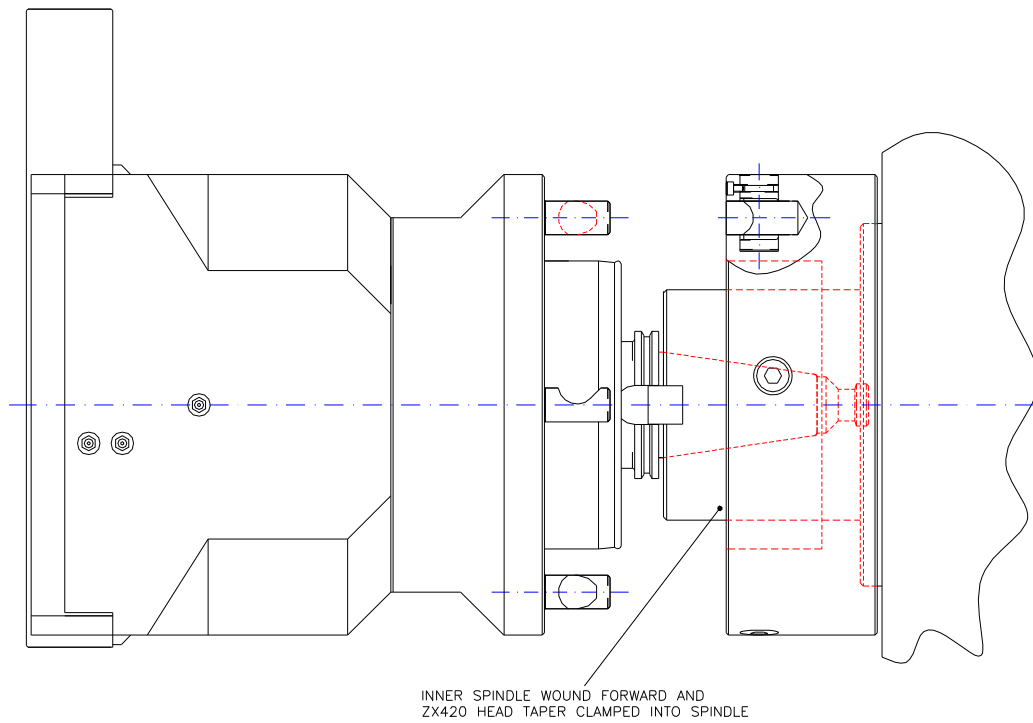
Locating and clamping the ZX420 head into the inner spindle
